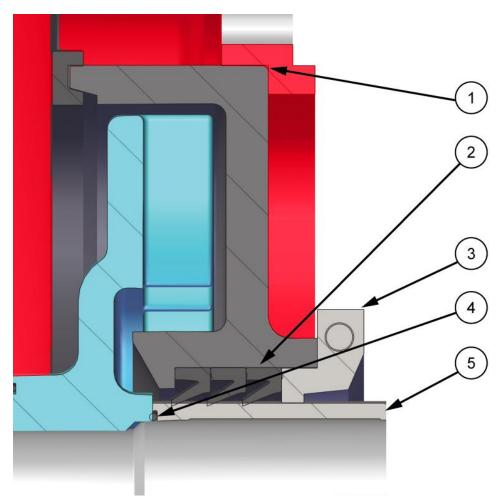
Fitting of Expeller Ring, Shaft Seals, Gland Studs, Gland, Shaft Sleeve, Shaft Sleeve O-Ring and Expeller.
